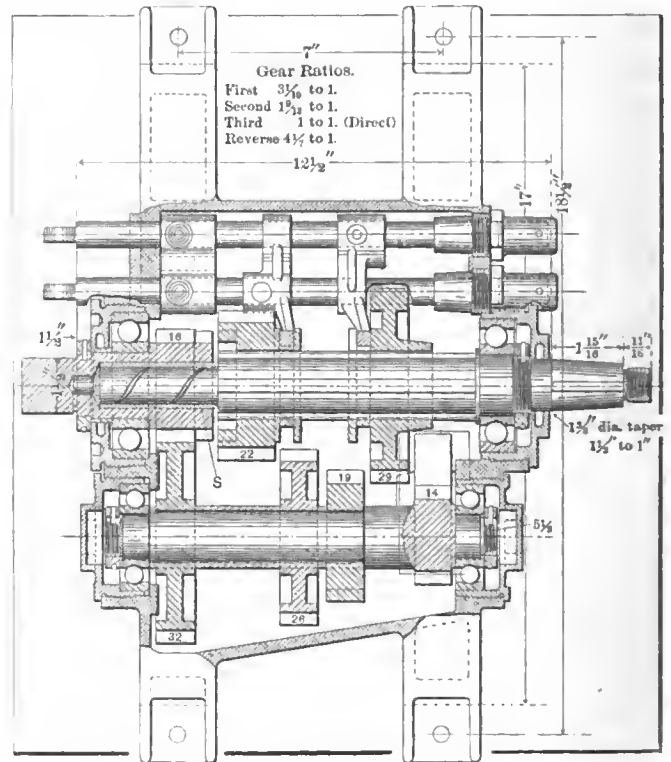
A modification of the Model M idea, differing in details, among which is the telescope joint bearing
